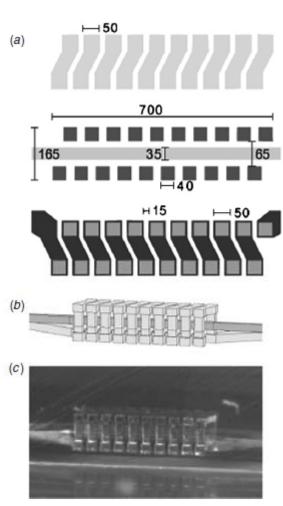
(a) CAD drawing of three individual layers used in constructing the coils. Dimensions listed are in μ m. (b) CAD drawing of a finished coil assembly. (c) Optical microscope image of a completed coil.
